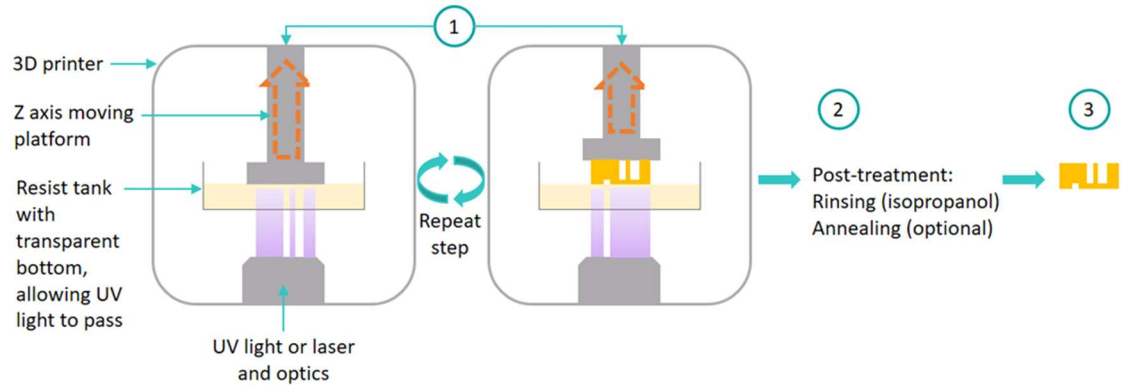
9 Presentation of 3D-printing process using SLA technology. 1. Step by step printing of the design on the platform 2. Post treatment of the printed piece once removed from the platform 3. Final piece
